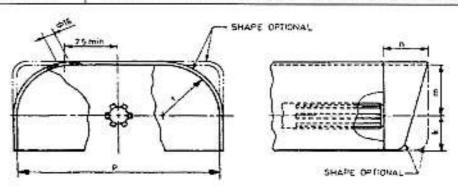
(b): DIMENSIONAL NOTATIONS OF PTO SHAFT MASTER SHIELD
